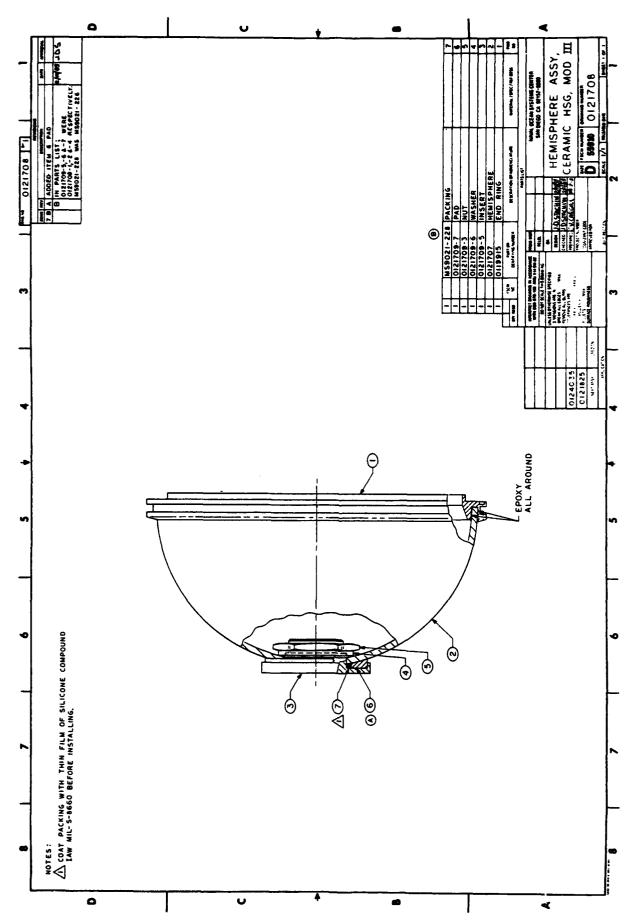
Ceramic bulkhead assembly Mod 3; list of components.
